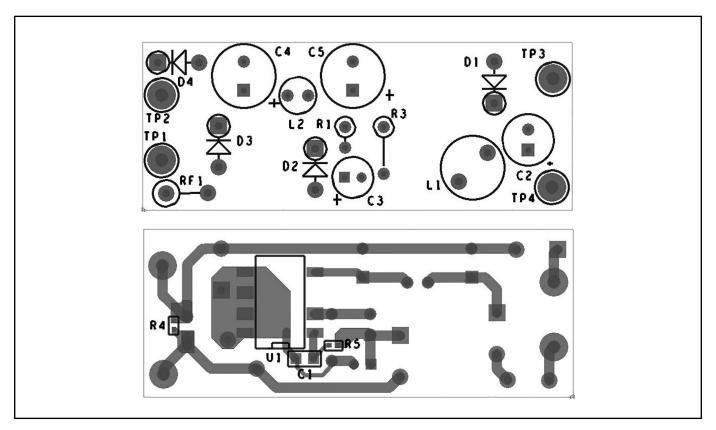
Recommended Printed Circuit Layout for LinkSwitch-TN2 using G Package.
